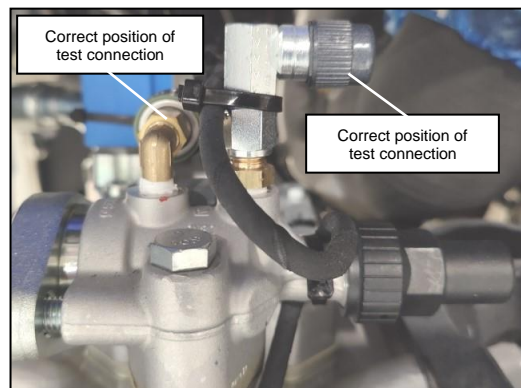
Correct position of high-pressure switch and test connection on refrigerant compressor discharge service valve
